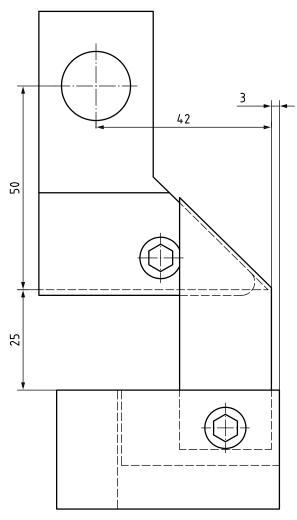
Test apparatus in starting position with the test specimen clamped in place
